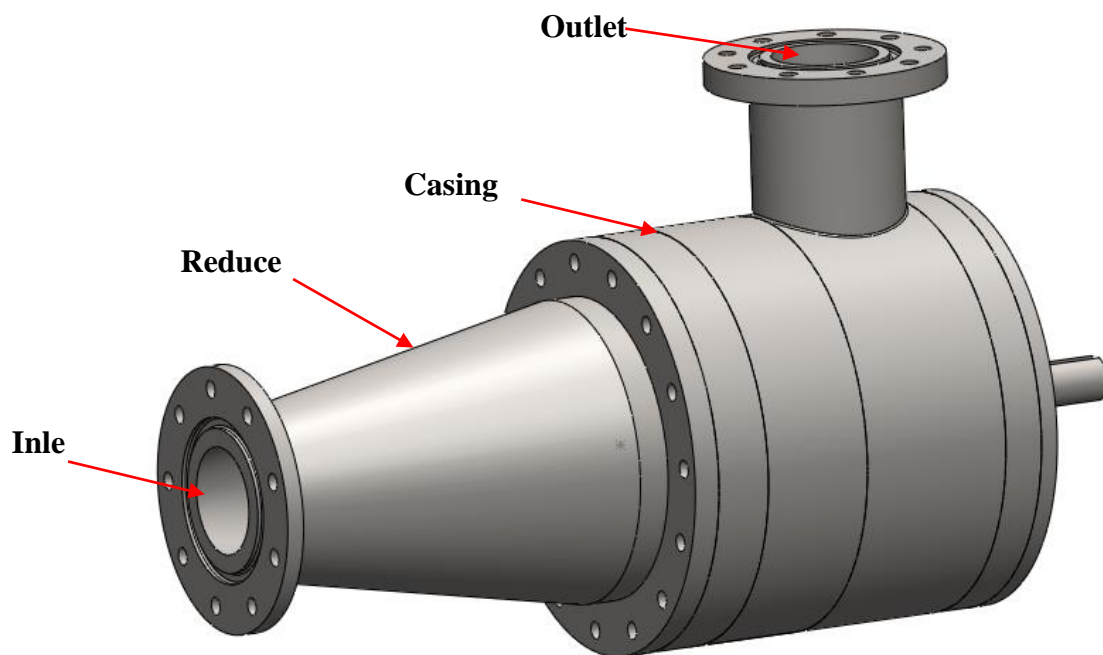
Isometric 3D view for a complete axial turbine assembly
